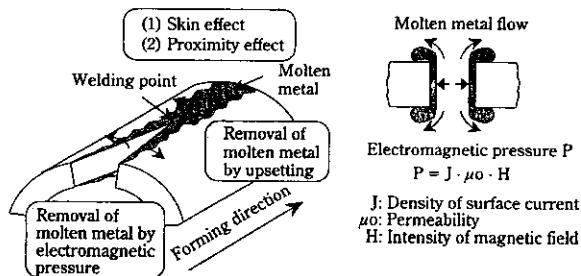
Welding phenomena in high frequency electric resistance welding of pipe
